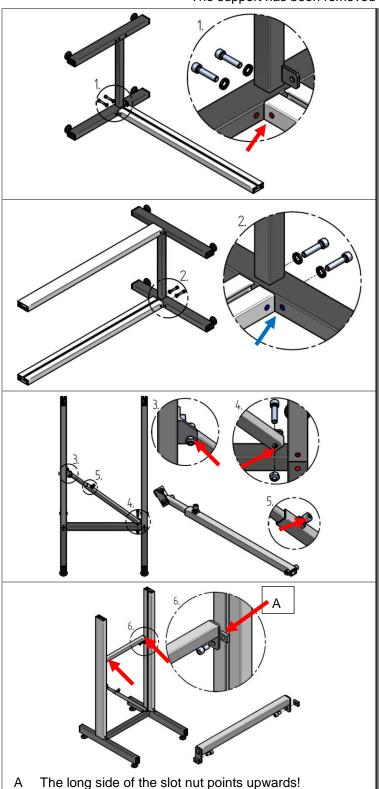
Assembly of the support – HE 020/ HM 140 $\,$
